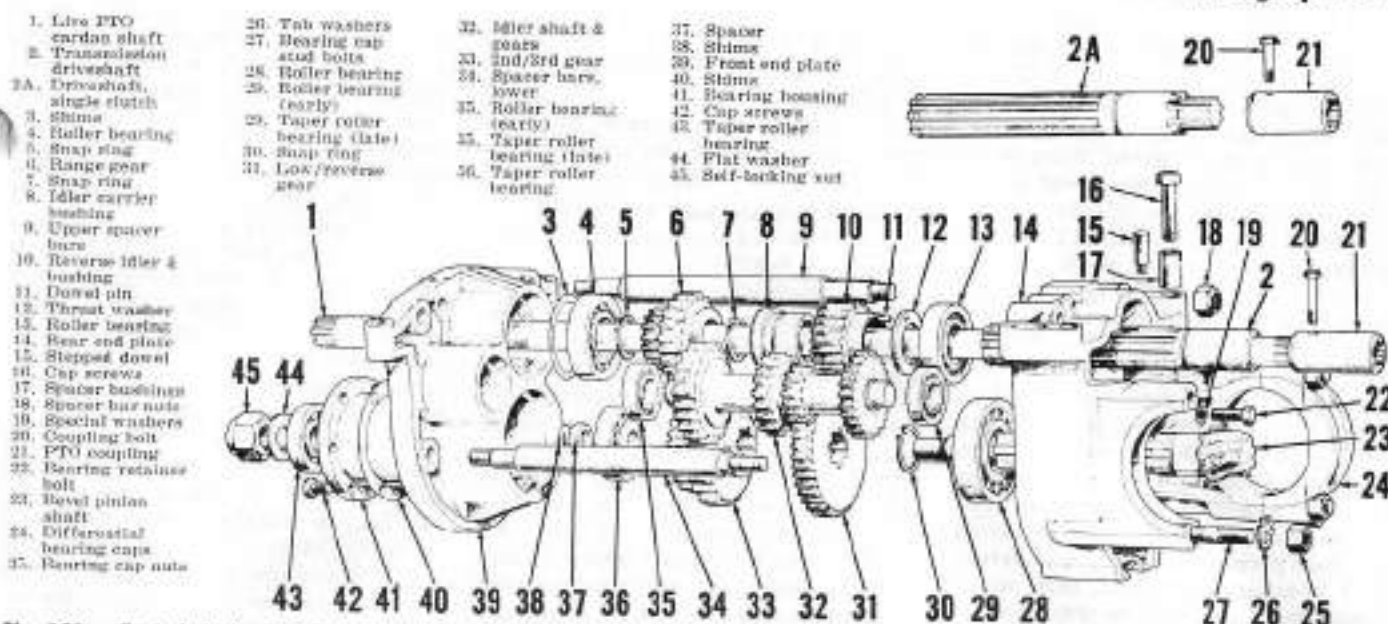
Exploded view of six-speed transmission typical of that used on models 780, 880, 3800 and 4600. On models 880 and 990 with single clutch, a solid driveshaft (2A) is used instead of hollow shaft (2) used with live PTO models. The six-speed transmission unit for 12-speed models is similar except for front end plate (39), driveshaft front bearing and shaft, pinion bearing housing (41) and other minor details. Refer to Fig. 108 for exploded view of components used on 12-speed models only.
